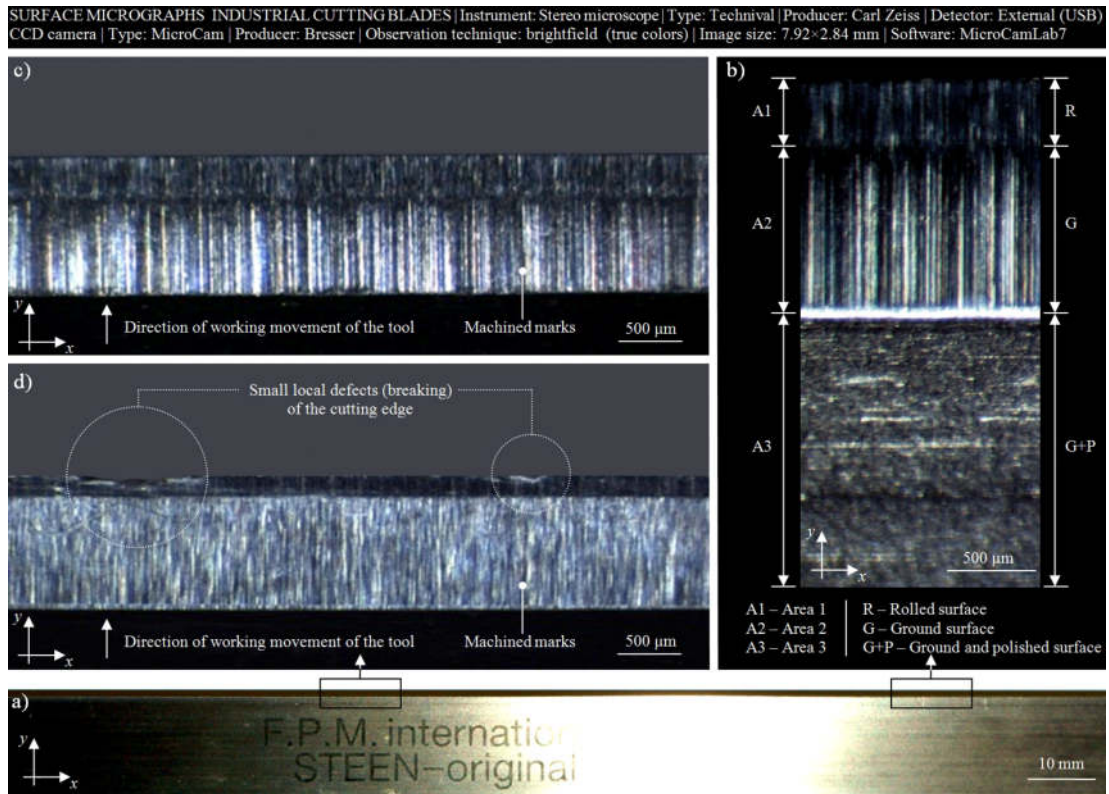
Surfaces of industrial cutting blades for X39CR13 steel used in experimental studies obtained by brightfield technique by the use of stereo microscope Technival (Carl Zeiss, Jena, Germany) equipped with CCD camera MicroCam 10MP (Bresser, Rhede, Germany): a) general view of industrial cutting blade in before machining condition (dimensions: 459.50×12.30×0.60 mm, hardness: > 61.00 HRC); b) micrograph of a fragment of industrial cutting blade in before machining condition with marked three areas corresponding to three machining; c) micrograph of a fragment of blade in before machining condition; d) micrograph of a fragment of industrial cutting blade in after machining condition (with visible surface defects)
